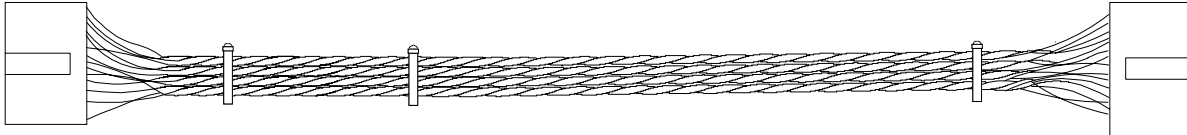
Optics (MCB to Interconnect) Cable Assembly
